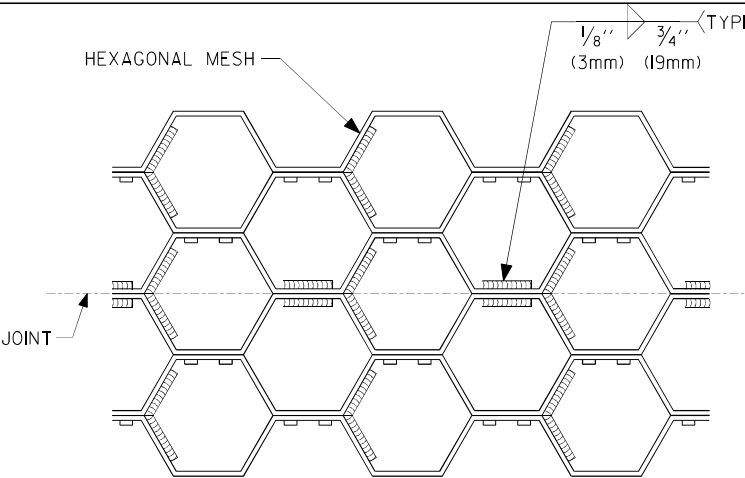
Hexagonal Mesh – Typical Welding Pattern
